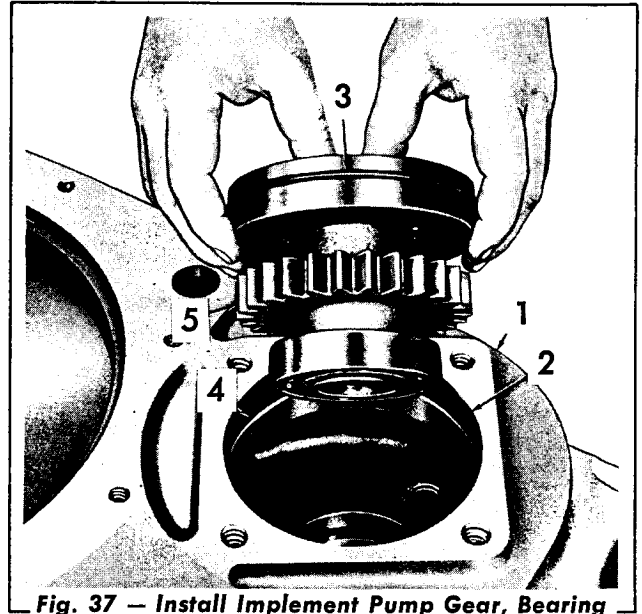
Install Implement Pump Gear, Bearing and Bearing Retainer Assembly
